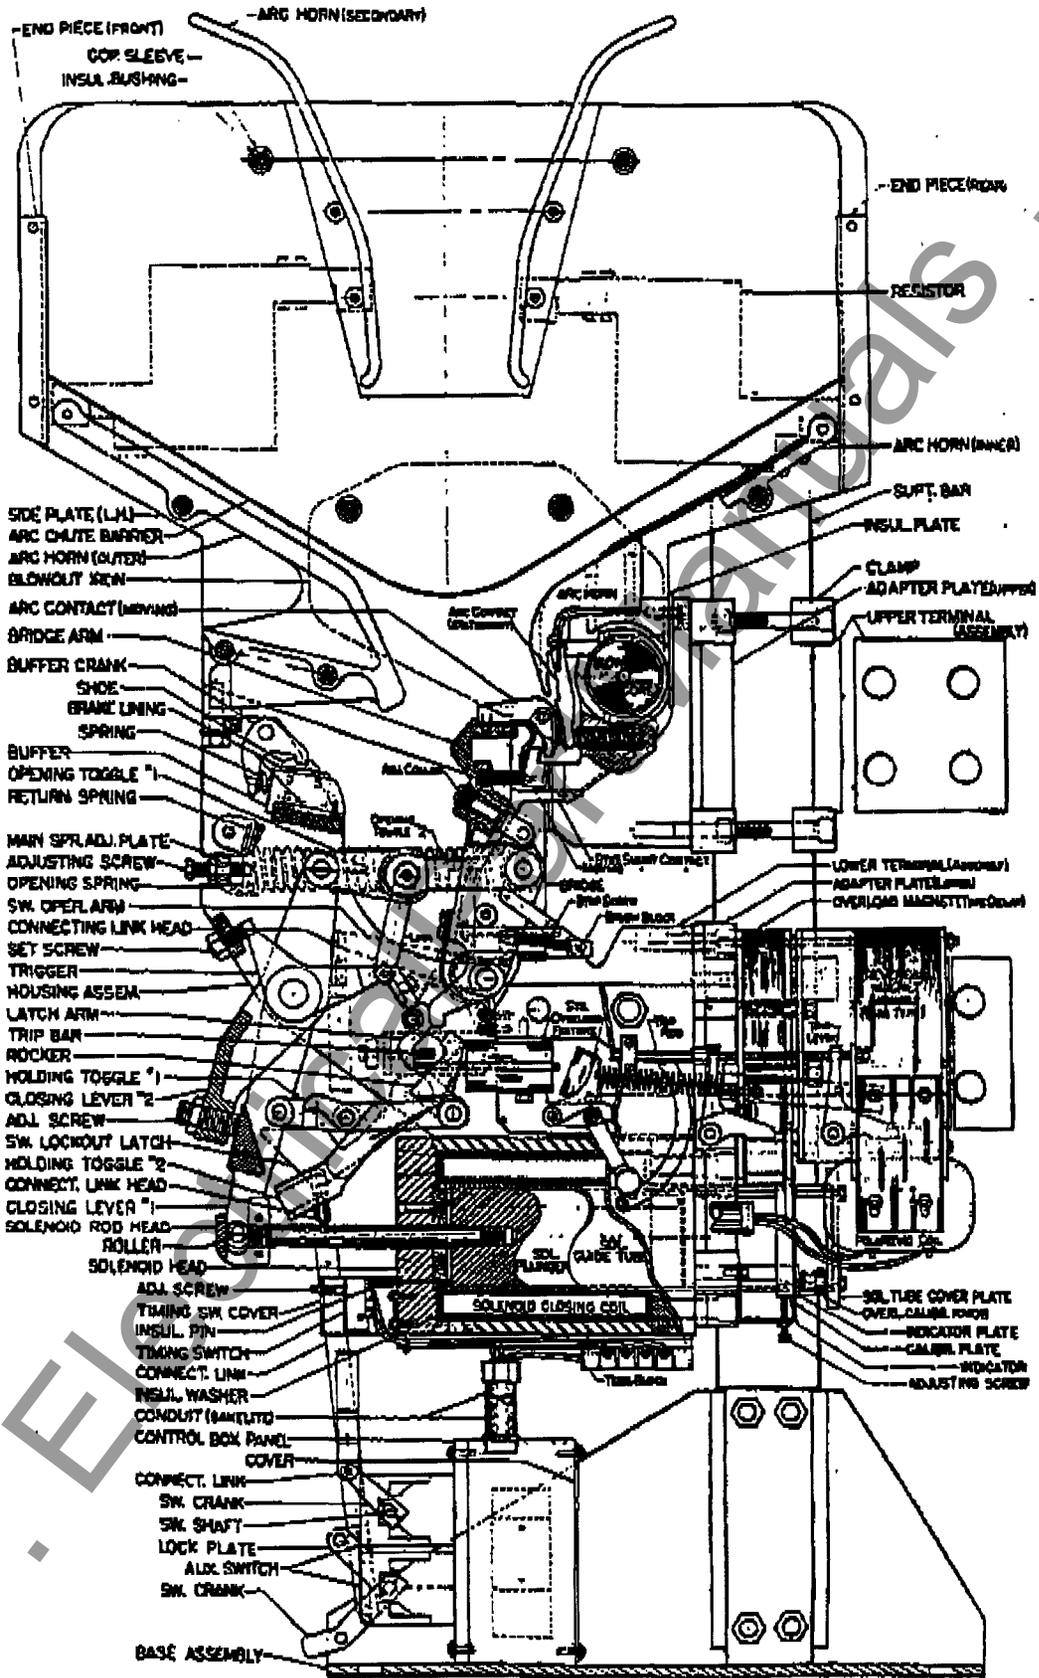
Type MT Circuit Breaker for Pedestal Mounting
